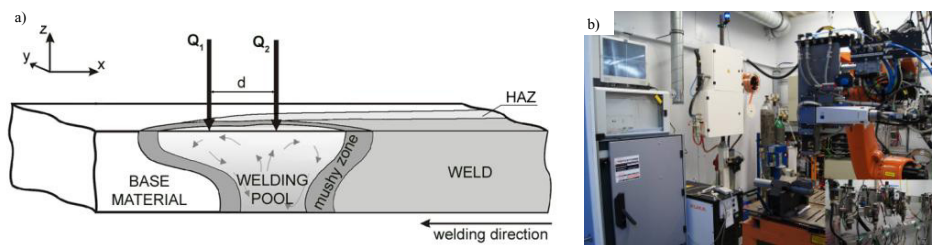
Hybrid welding process: a) scheme of considered system, b) robotic laser welding station TruDisk 12002.
